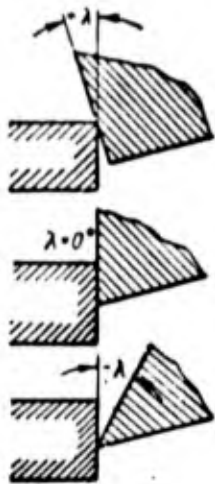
Diagram Showing Site of Initial Impact of Cutting Edge of End Mill Tooth on Contact with the Workpiece, Varying with the Axial Rake λ .
